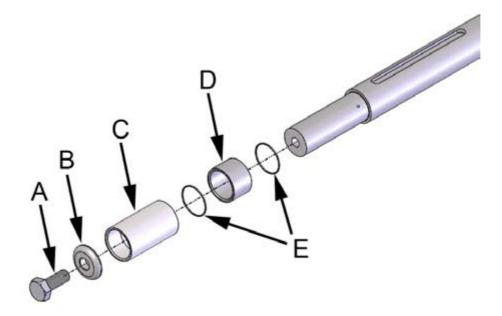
The shaft sleeves of a grease-lubricated rear end bearing
